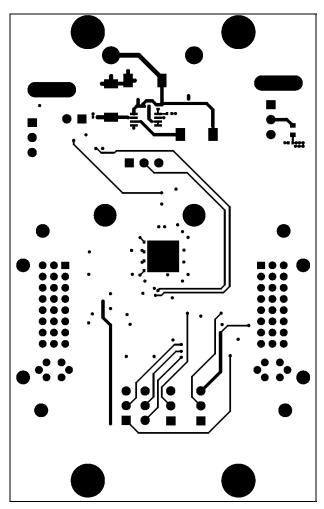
MAX3815 EV Kit PC Board Layout—Solder Side
